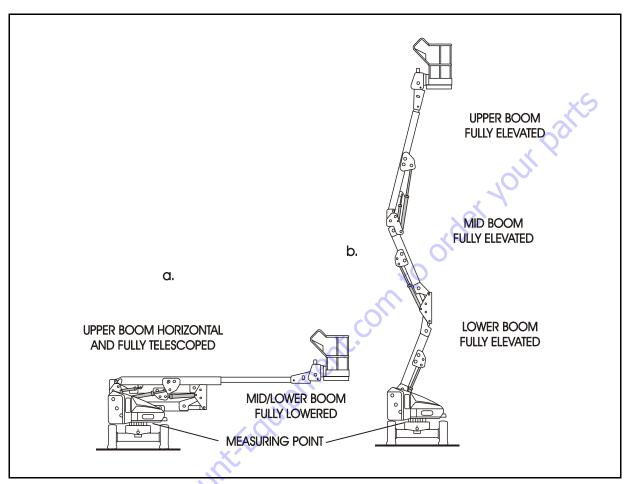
Swing Bearing Tolerance Boom Placement
